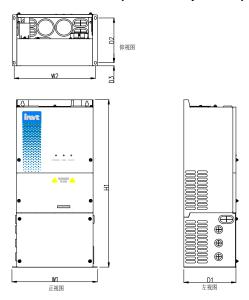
Floor installation (w/o top cover) for 220V 7.5-45kW/380V 15-90kW
